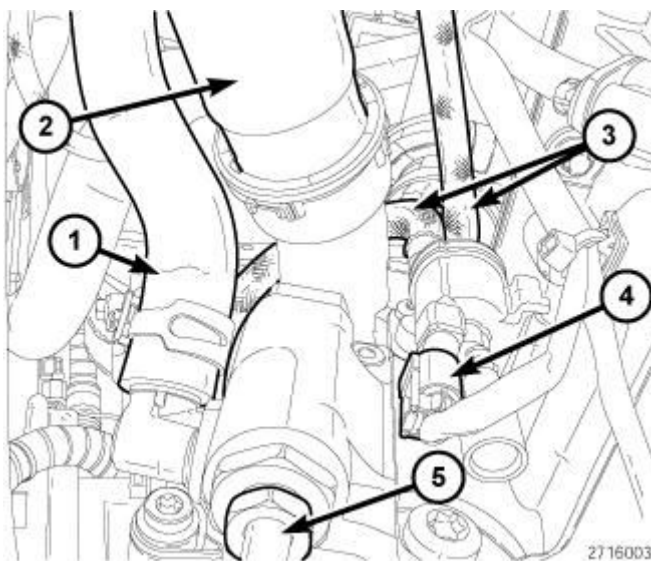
Vacuum Lines, Coolant Inlet Hose, Power Steering Pump Supply Hose & Vacuum Switch Connector
